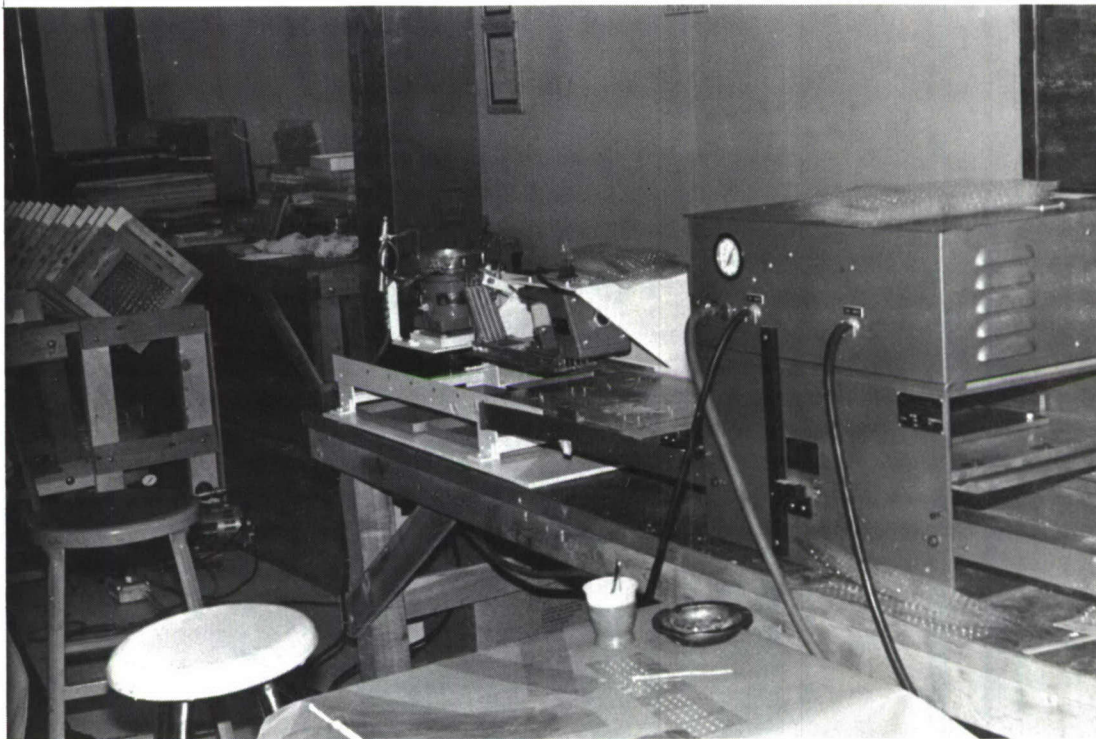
Tablet Filler and Blister Sheet Heat Sealer
